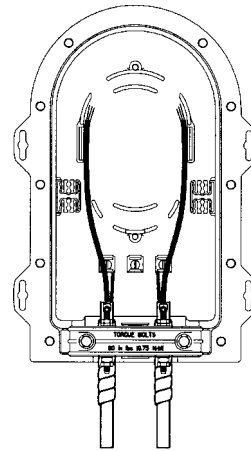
ROUTING CENTRAL TUBES FOR CABLES IN OUTSIDE ENTRIES
